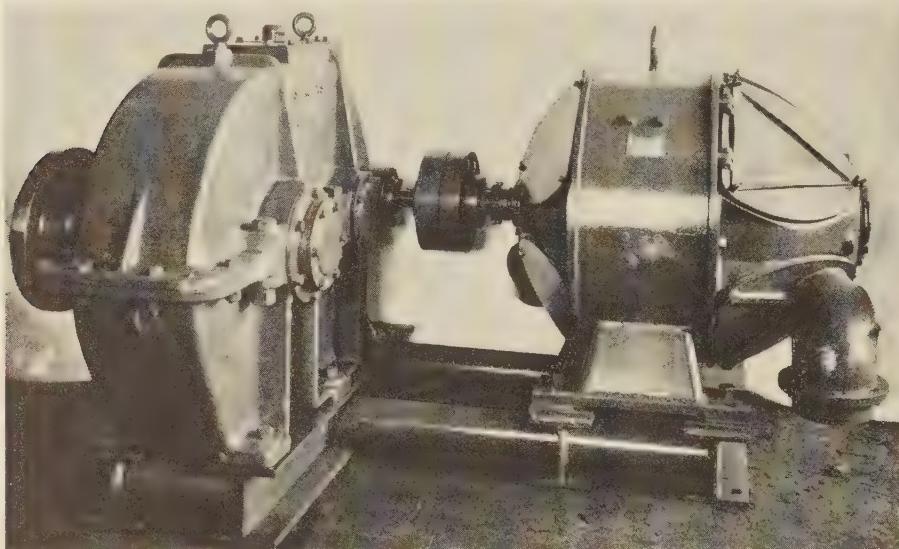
DISSIMILAR SHAPES USED IN A BEDPLATE WHICH BECAUSE OF THE SHAPES USED HAVE A DISPLEASING APPEARANCE
